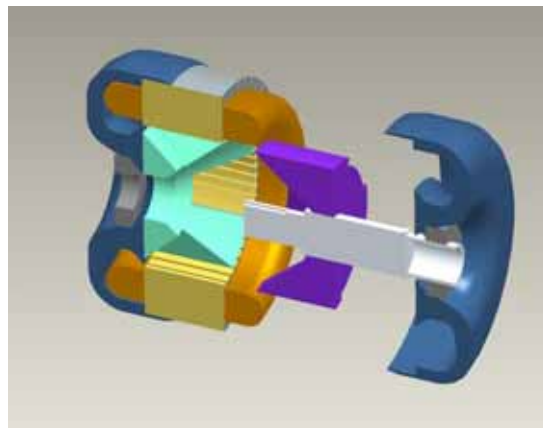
Exploded view of the AEEMS motor showing subcomponents.
